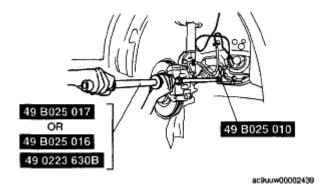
Separating Right Side Drive Shaft Courtesy of MAZDA MOTORS CORP.
